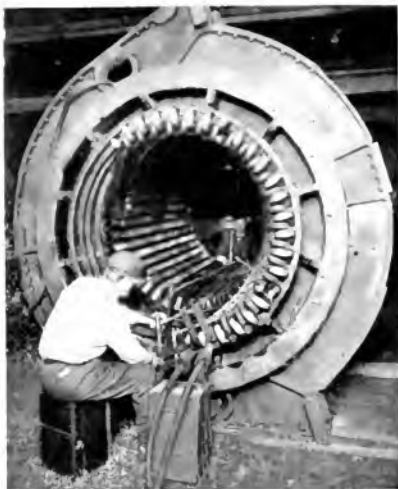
Assembling the Stator Coils in the Turbine generator of the Electrically Propelled Battleship Maryland
